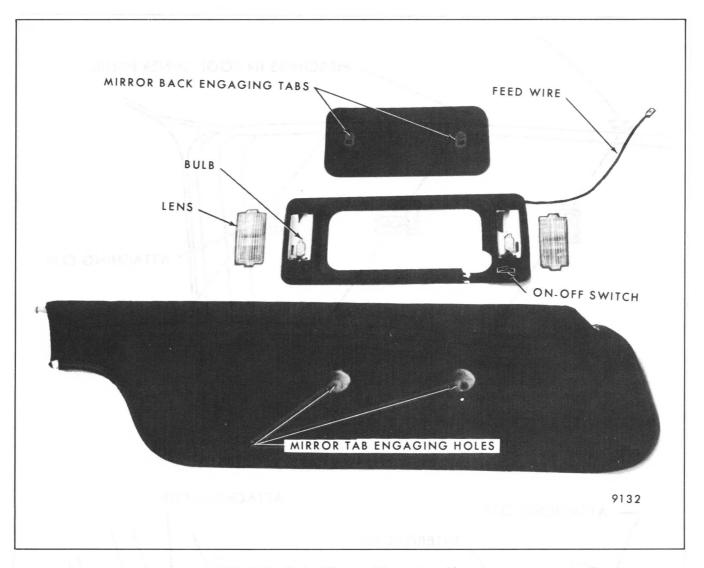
Vanity Mirror and Lamp Assembly
